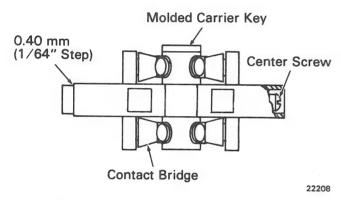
Typical Interlock Contact Carrier Assembly
